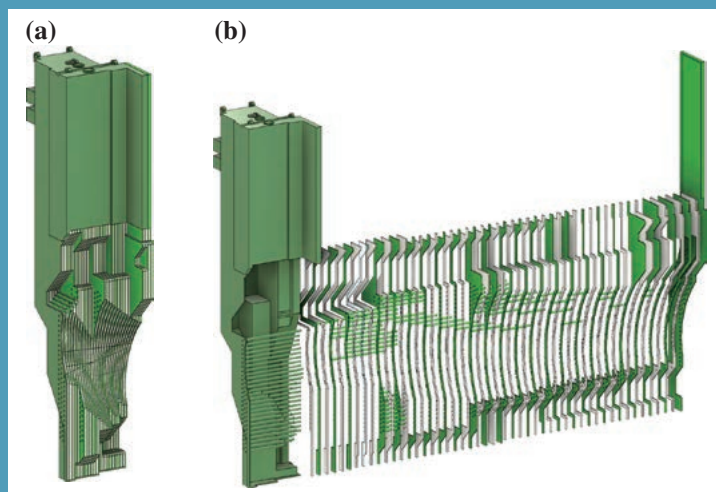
(a) 3D diagram and (b) its exploded view of a breeding blanket module of CARDISTRY-B3.
